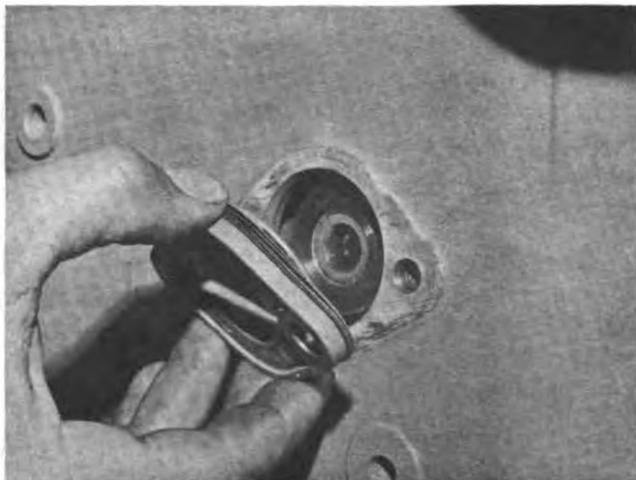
(N11440). The Camshaft Thrust Plate.
